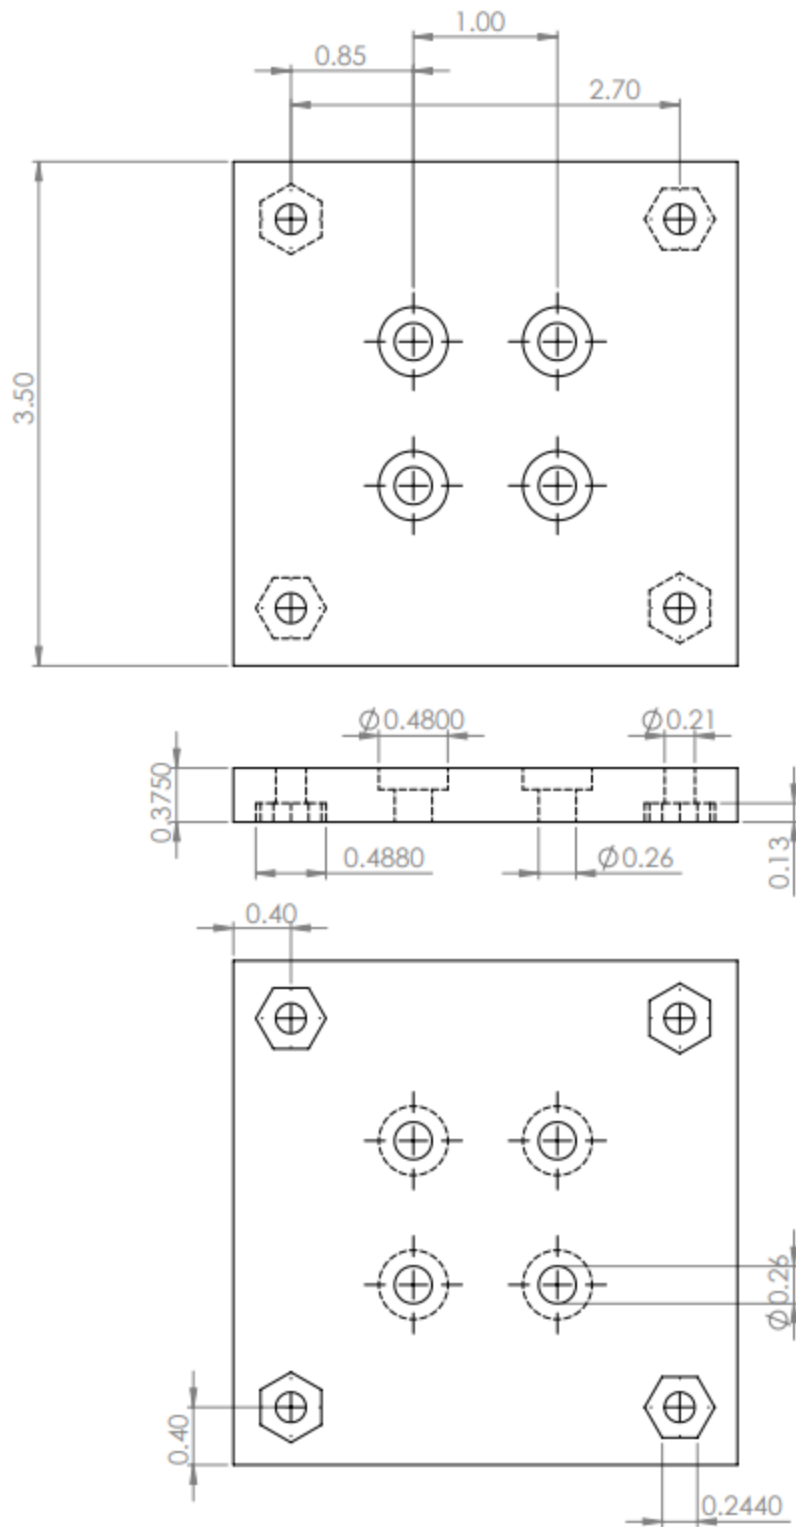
80/20 Mount Engineering Drawing (IPS)
